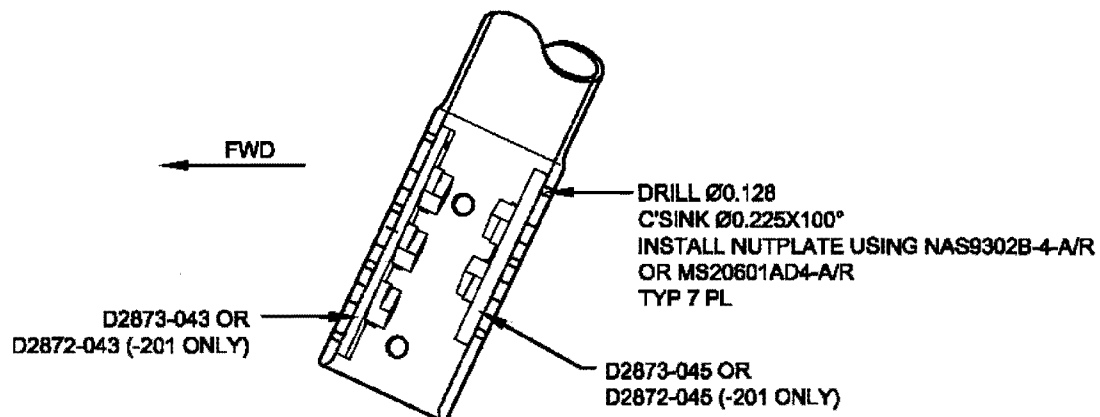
Nut Plate Installation for D206-667-101/-103/-201/-203 or D407-667-105/-205 crosstubes at CHG 001
